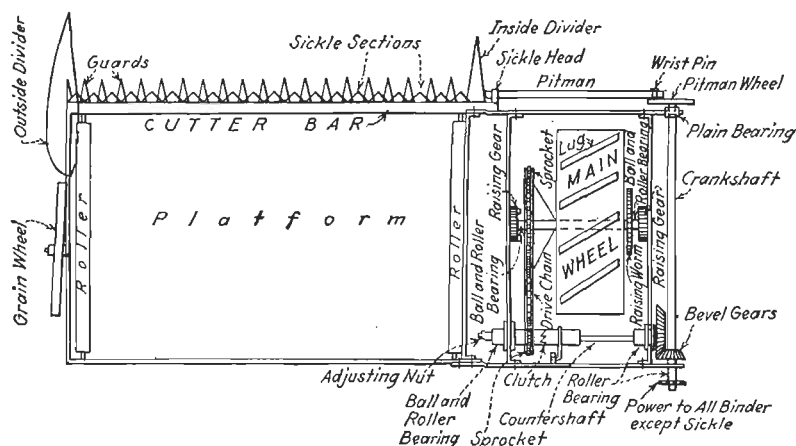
Overhead view of the transmission of power from main wheel to sickle, with frame and platform.
